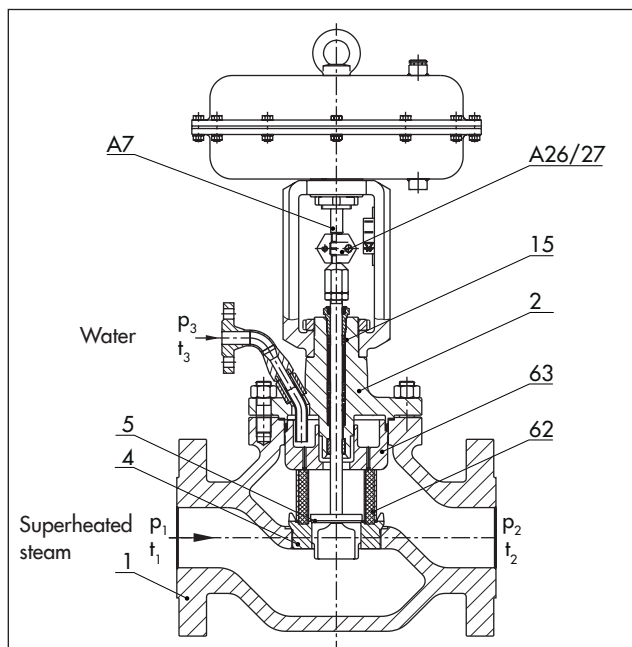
Type 3281-1 Pneumatic Steam Conditioning Valve with flanged connections and Type 3271 Actuator
